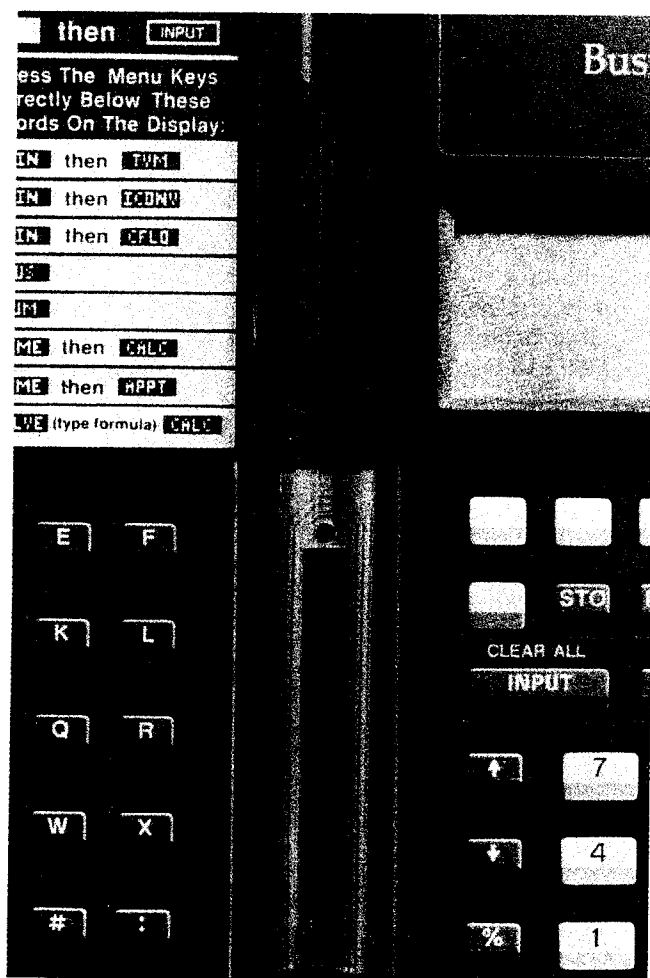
Double exposure photograph showing shape of flex circuit and its location within the hinge assembly.
